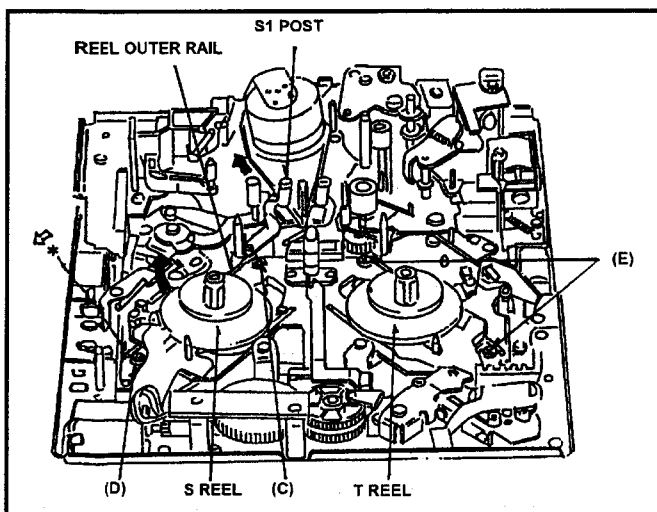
Removal of S & T Reel Rotor Unit
